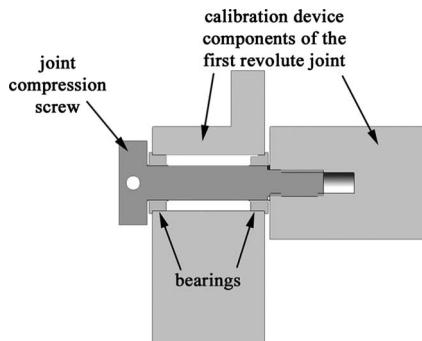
Illustration of the revolute joint design. Revolute joints in the calibration device were constructed with a double-bearing compression design. The joint compression screw, when tightened, minimized any play in the joint due to machining and assembly tolerances.
